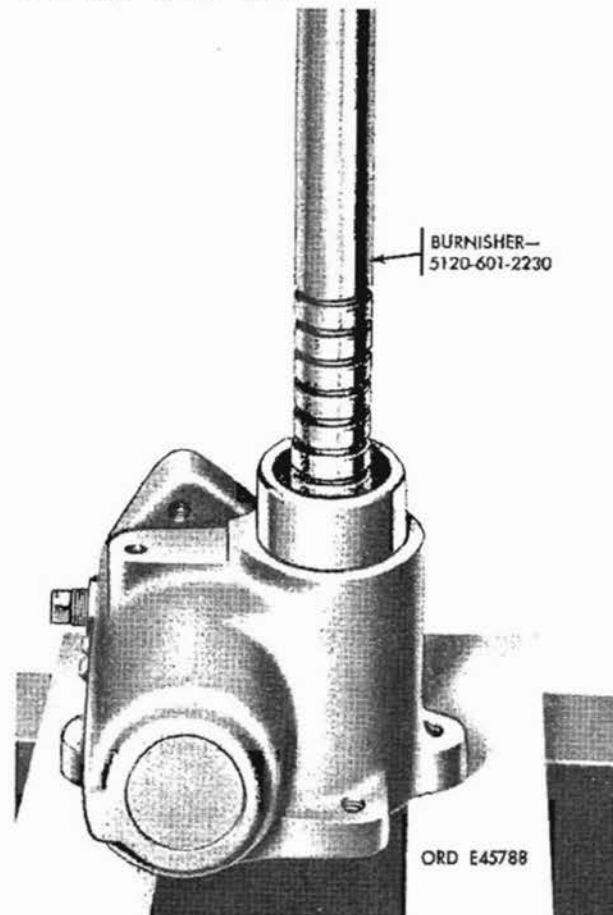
Burnishing lever shaft bearings using burnisher - 5120-601-2230.
